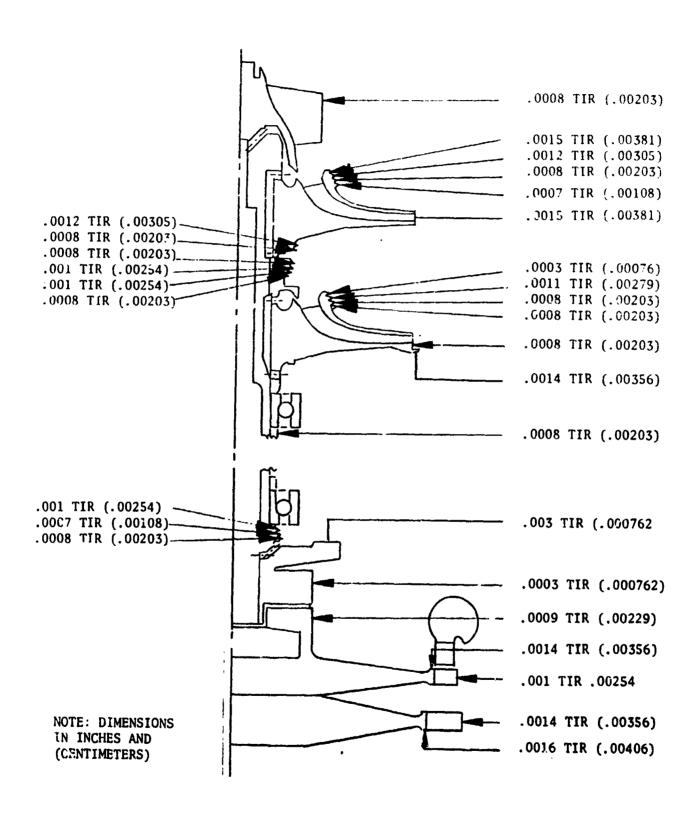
APS Fuel Turbopump S/N 01 Rotor Runouts
